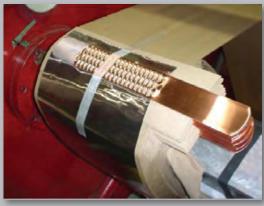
Integrated Cold Welding System for Coil Terminals Distribution and Small Power Transformers
